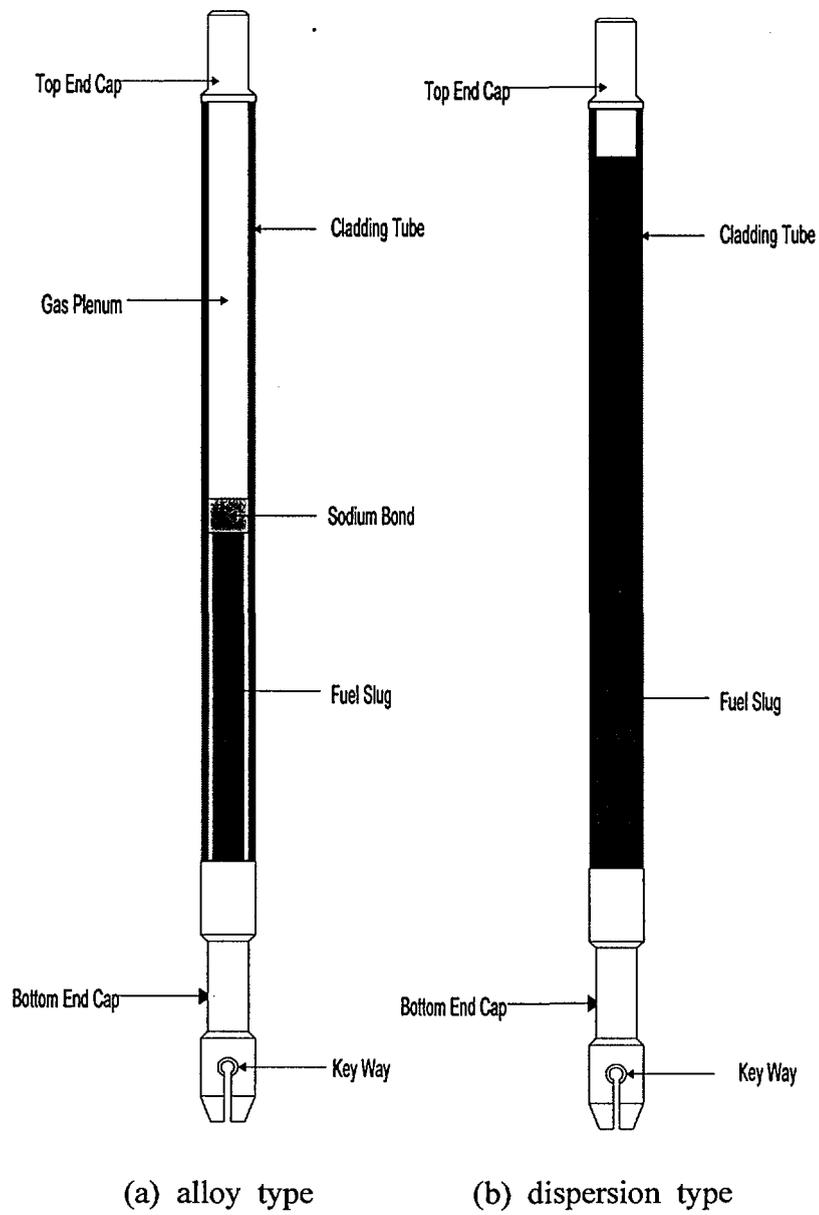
Schematic of the HYPER Blanket Fuel rod.
